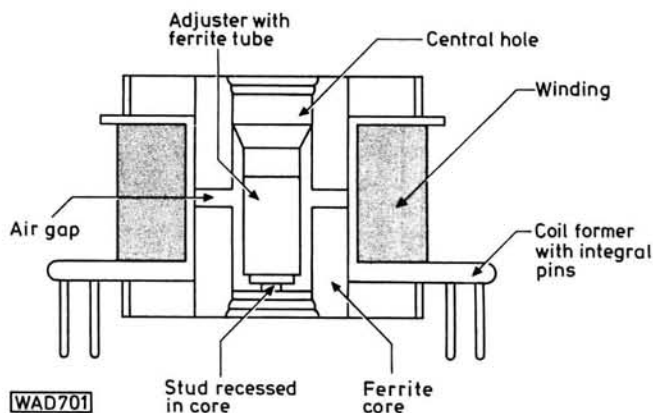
Cross-section through a RM type core showing the coil winding and the adjuster
